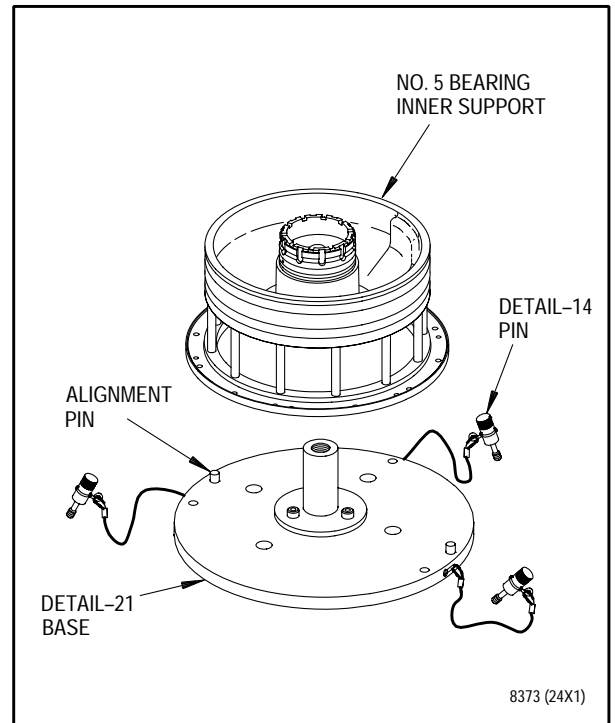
No. 5 Bearing Inner Support Assembly and No. 5 Bearing Inner Race and Rollers - Assembly (Sheet 1 of 6)
